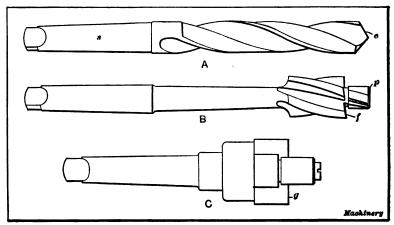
(A) Twist Drill. (B) Solid Counterbore. (C) Counterbore with Inserted Blade
